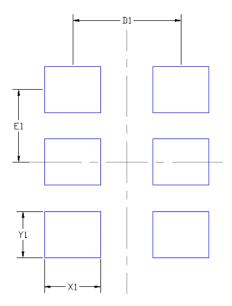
Si560 (2.5×3.2 mm) PCB Land Pattern
